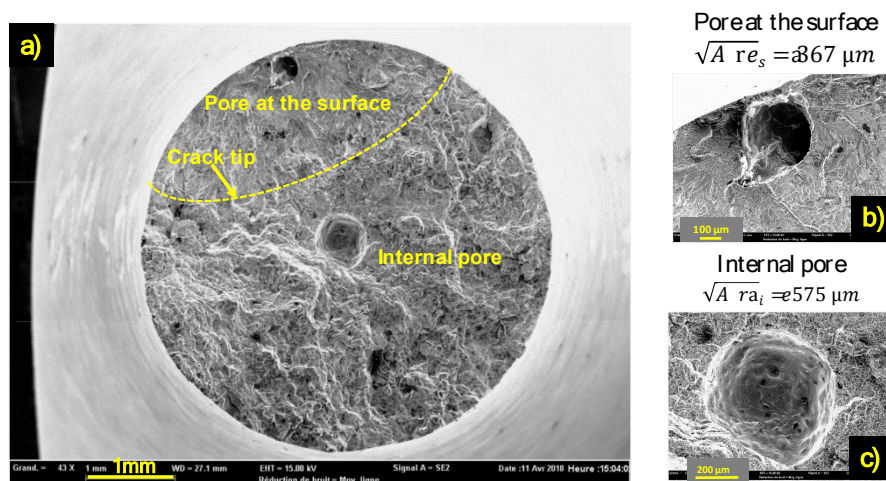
Fatigue failure, specimen B-V1-05, Sa= 55 MPa, Nf=919402 cycles, (a) Macroscopic view, detailed view of (b) surface pore and (c) internal pore
